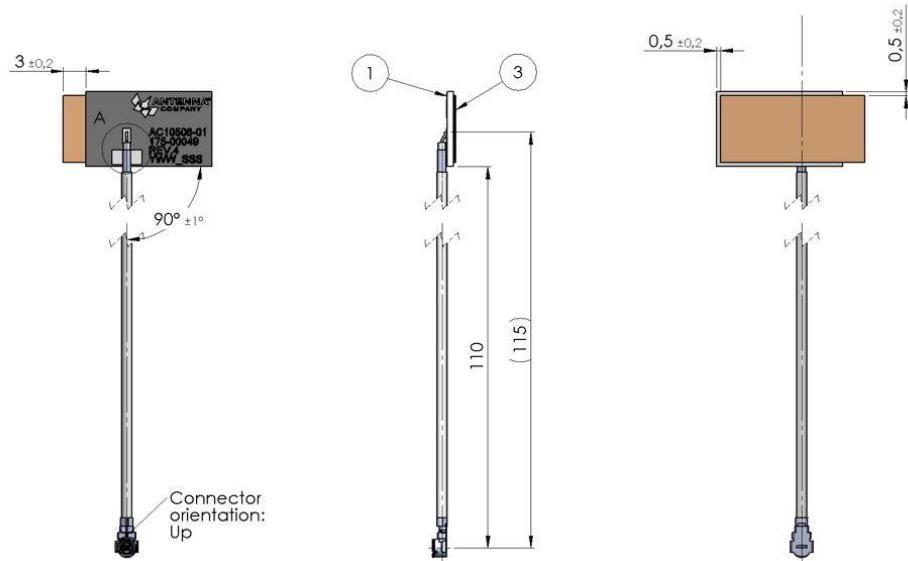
AC10506-01B top/bottom view and dimensions (mm)
